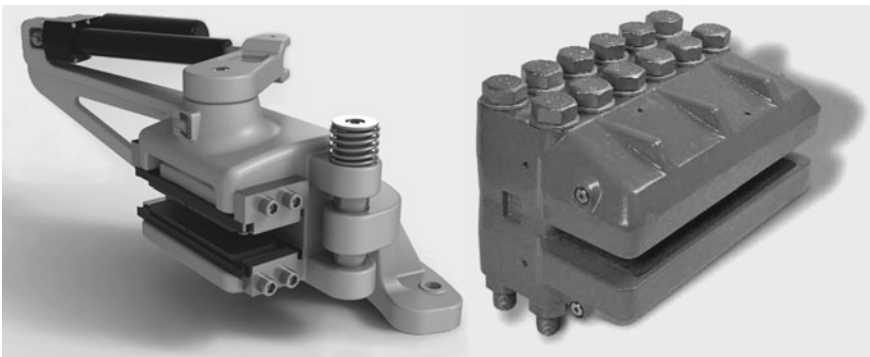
Brake calipers: electric [KTR Kupplungstechnik GmbH], hydraulic [Svendborg Brakes]
